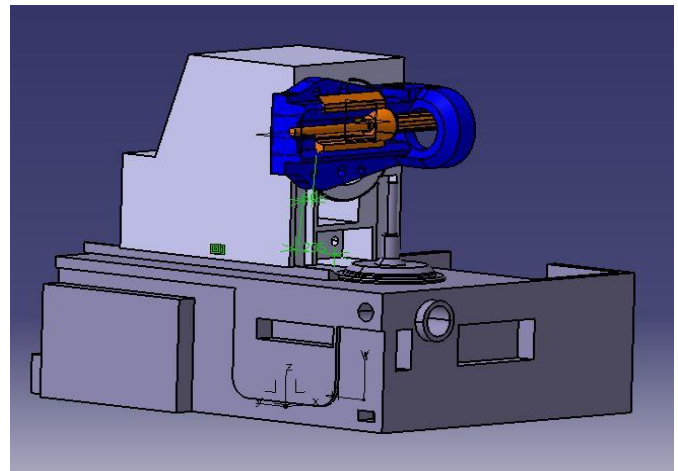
Gear Hobbing Machine Catia Model (PA300)
